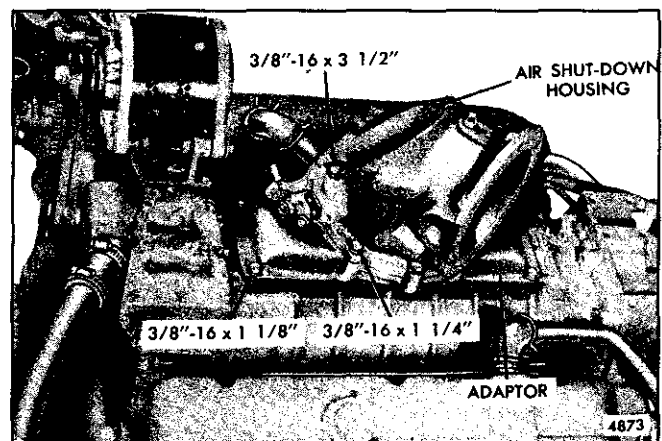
Location of Air Shutdown Housing and Adaptor Mounting Bolts (8V-53 Engines)
